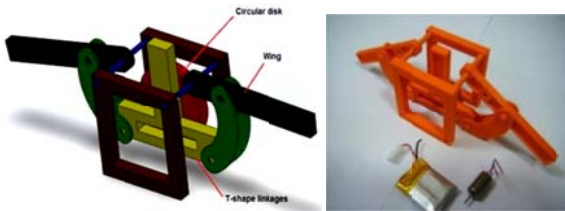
The first generation of mechanism design for the flapping-wing robot. (a) CAD model (b) Fabricated prototype.
